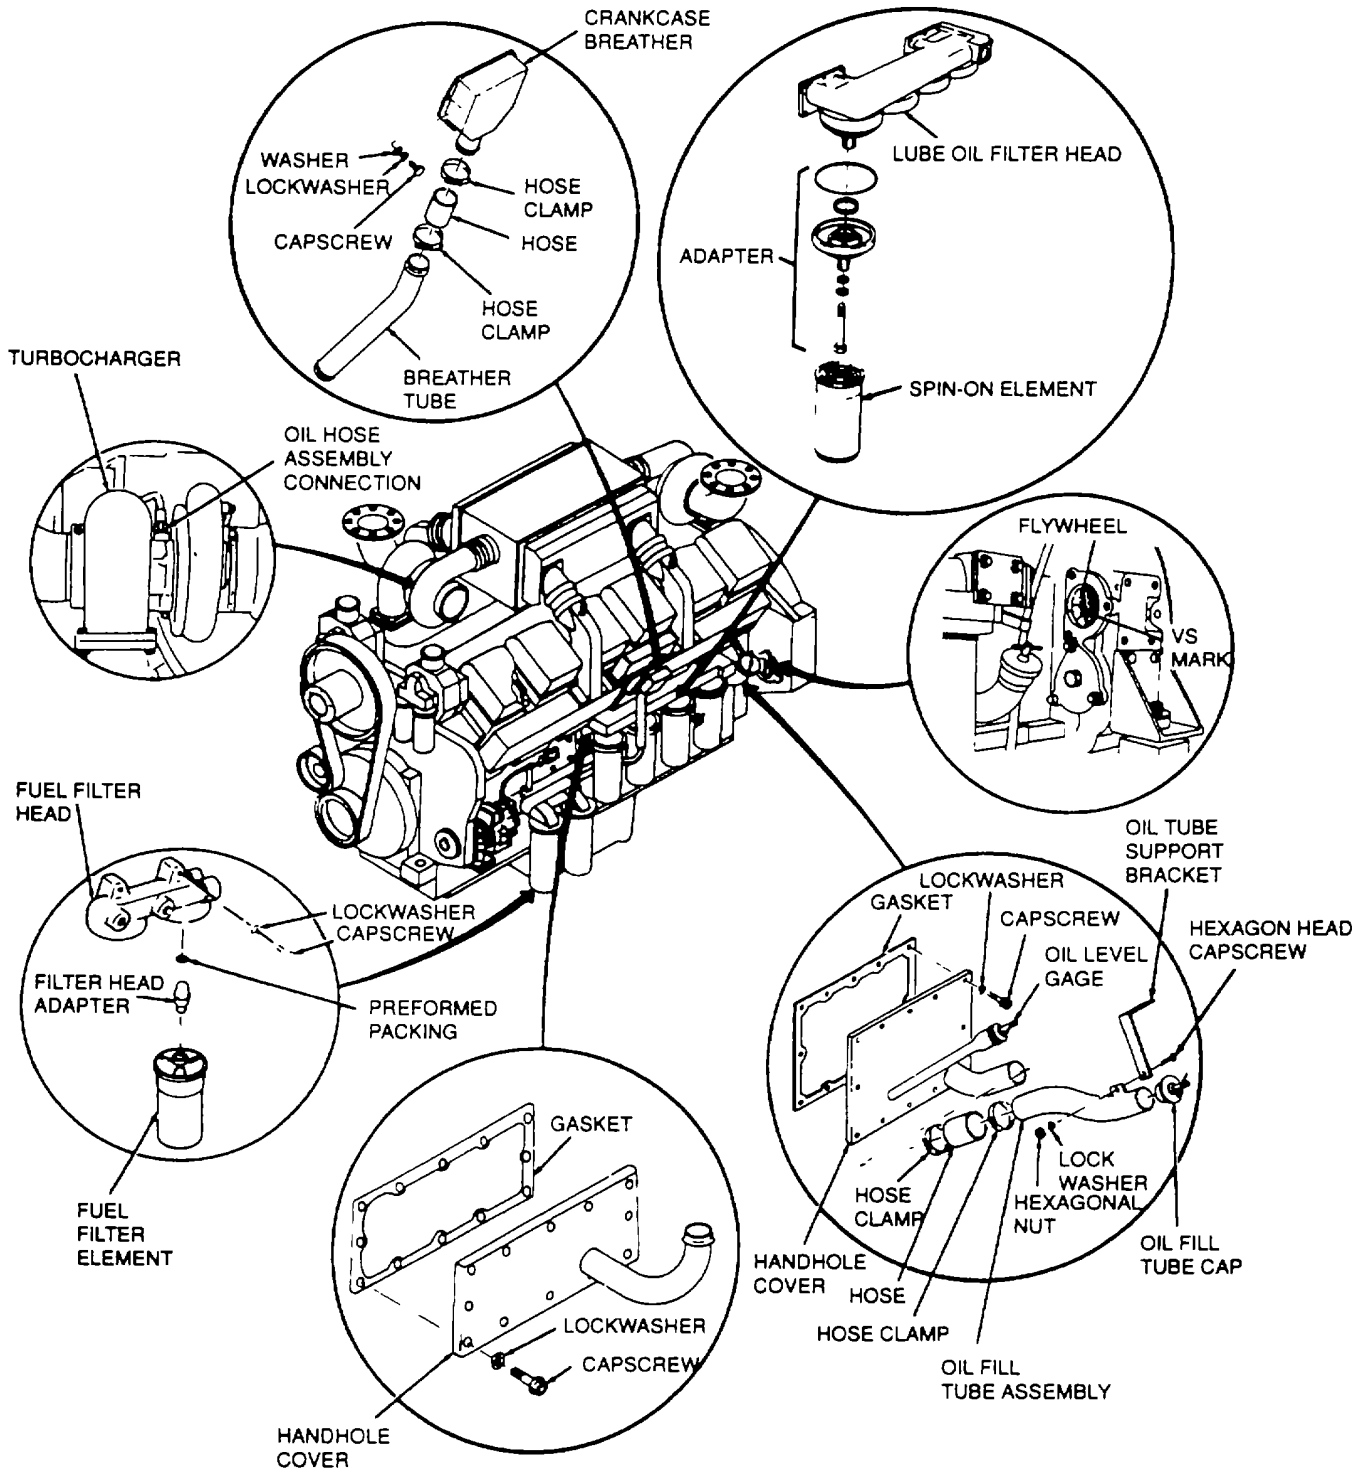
Engine and Related Parts (Sheet 2 of 5)
